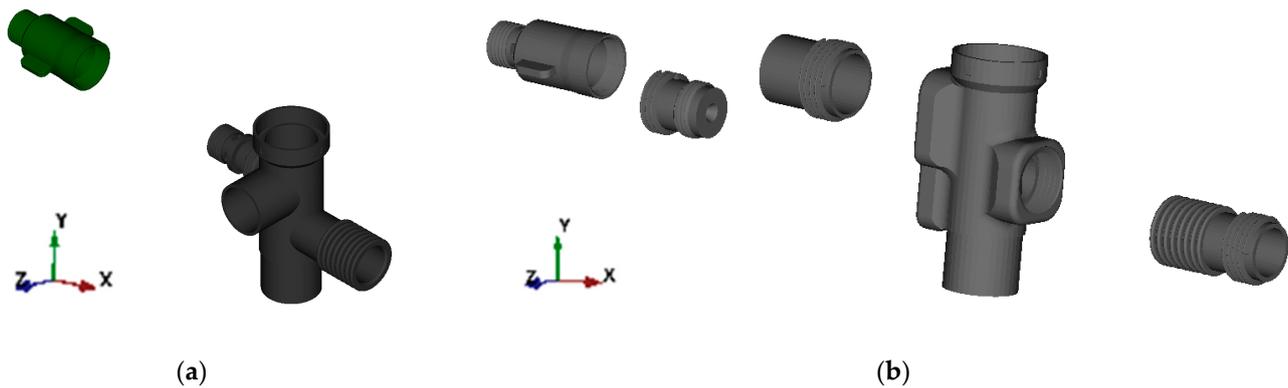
(a) Initial CAD of the top modulator; (b) final CAD of the top modulator.
